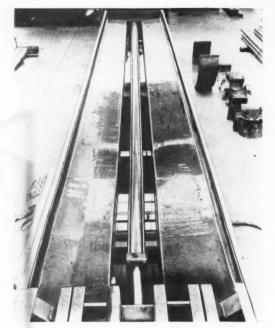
Illustration showing 22-foot stroke hydraulic cylinder used in honing machine constructed by Planet Products Company to hone air and hydraulic cylinder tubing
